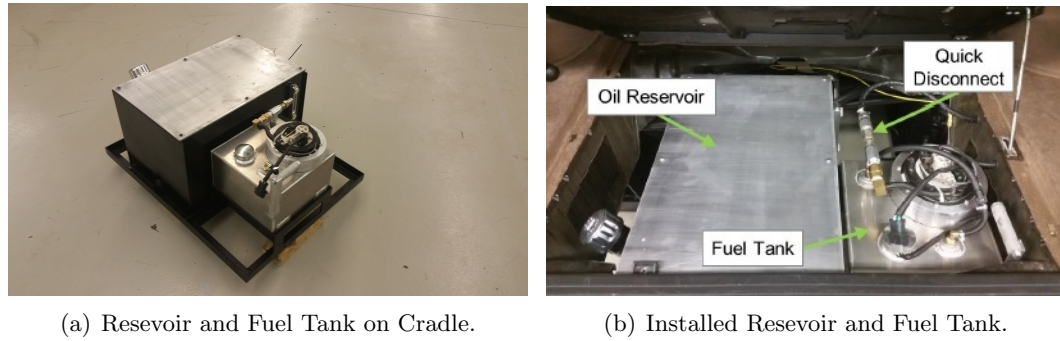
Oil Reservoir and Fuel Tank Assembly.
